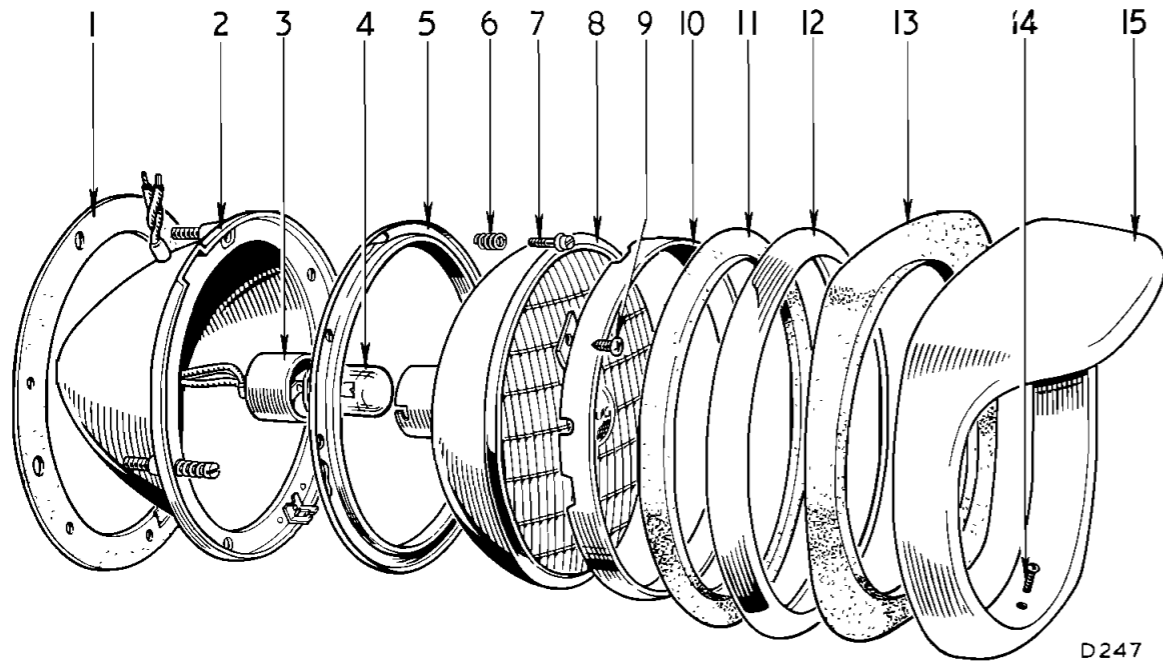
Exploded arrangement of Herald 1200 and Spitfire headlamps
